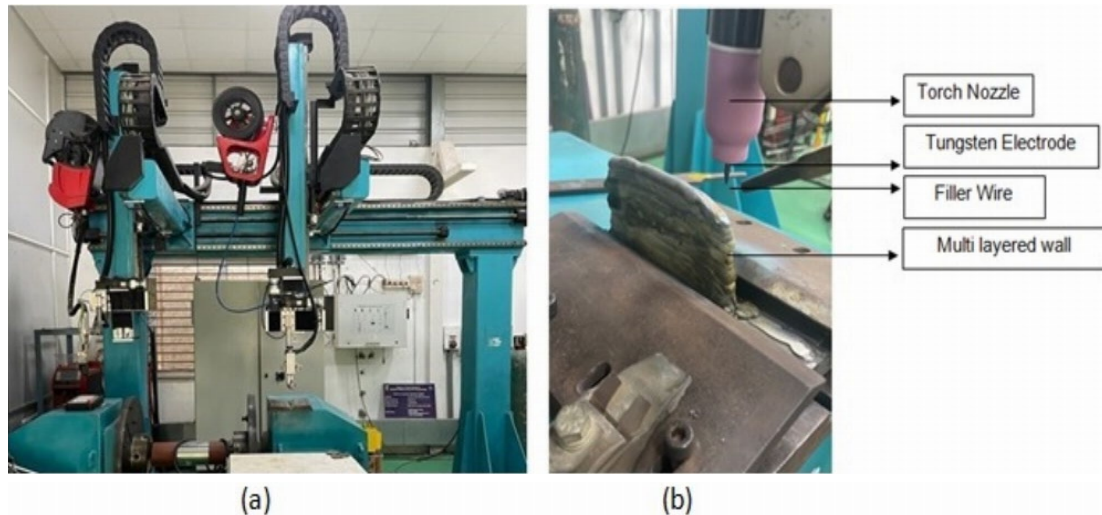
(a) & (b) Experimental Setup of Semi-automatic GTAW Gantry welding robot
